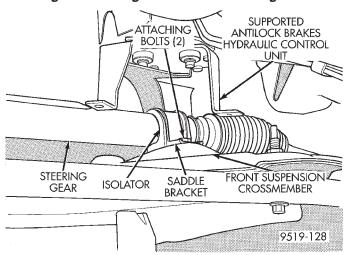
Steering Gear Saddle Bracket Mounting Bolts
